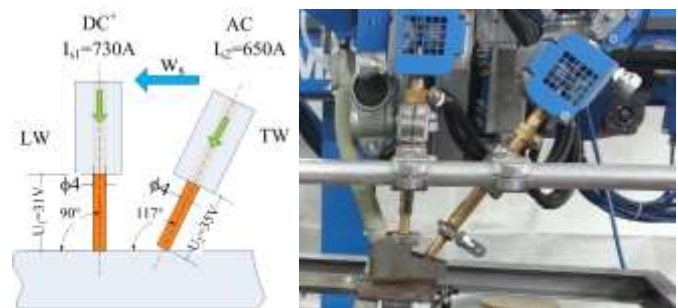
Positioning of welding torches (schematic and real view)
